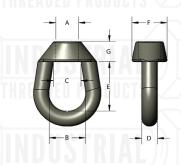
WELDLESS EYENUT, DOMESTIC, RIGHT HAND THREADS
